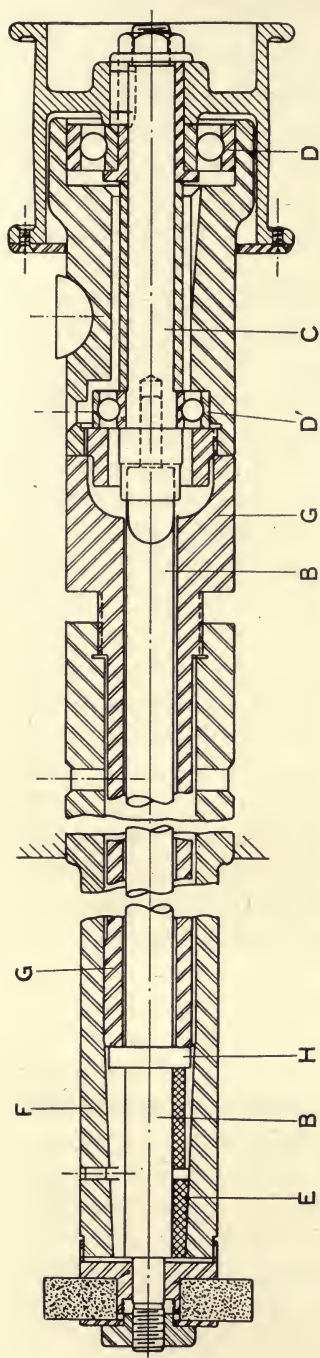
BROWN & SHARPE INTERNAL GRINDING SPINDLE
